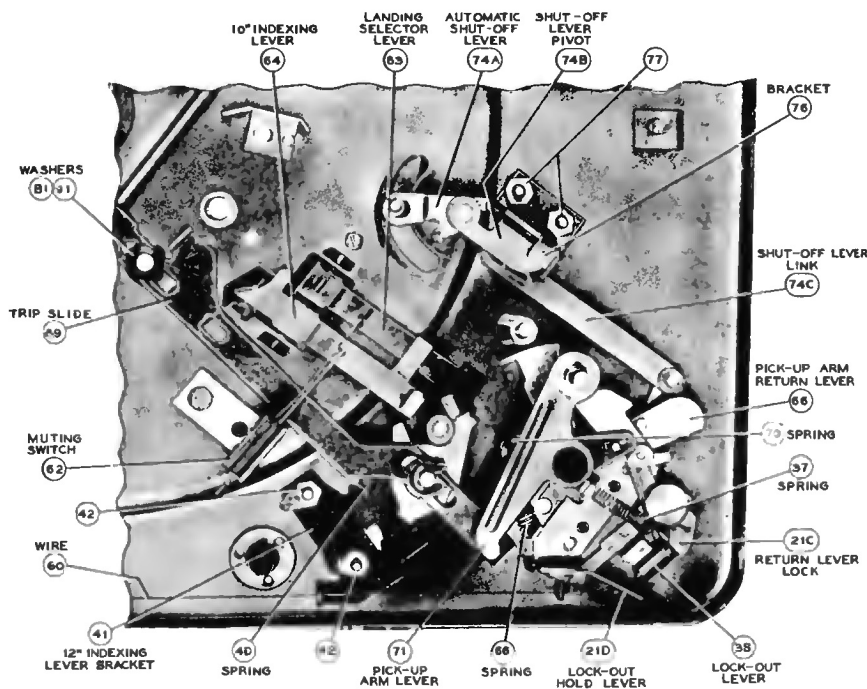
Partial Bottom View of RP-205-2 with Cycling Slide Removed
